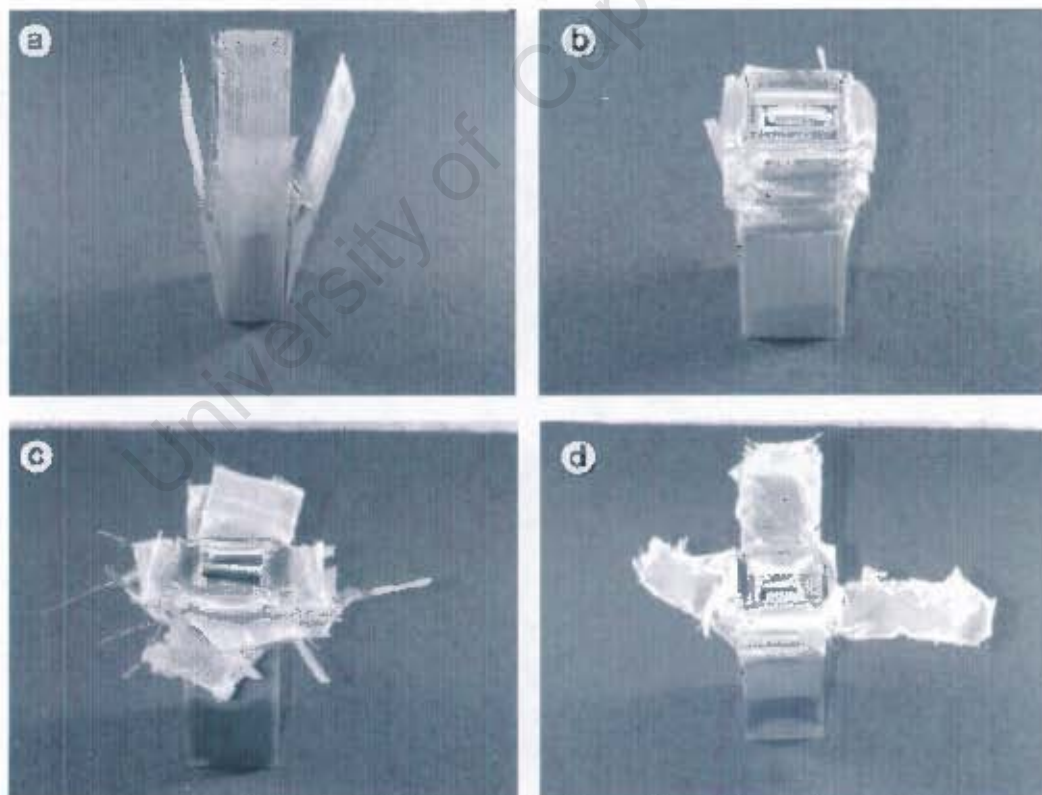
Failed hybrid tubes obtained from the axial crushing test [123]
